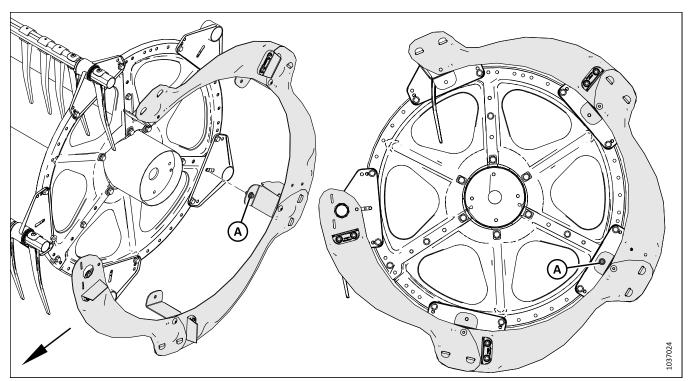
Five-Bat Reel – Partially Assembled Reel Endshields on Reel
